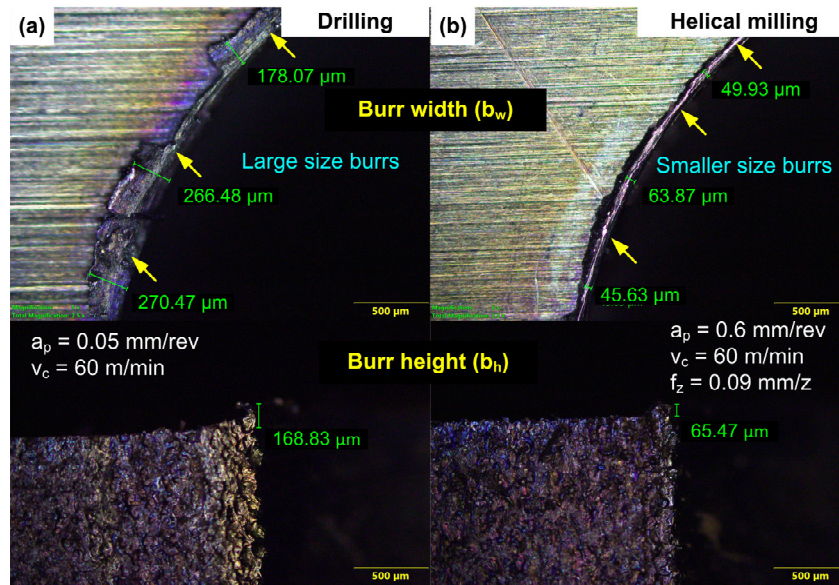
Exit burrs at the hole periphery. (a) Drilling process. (b) Helical milling process.
